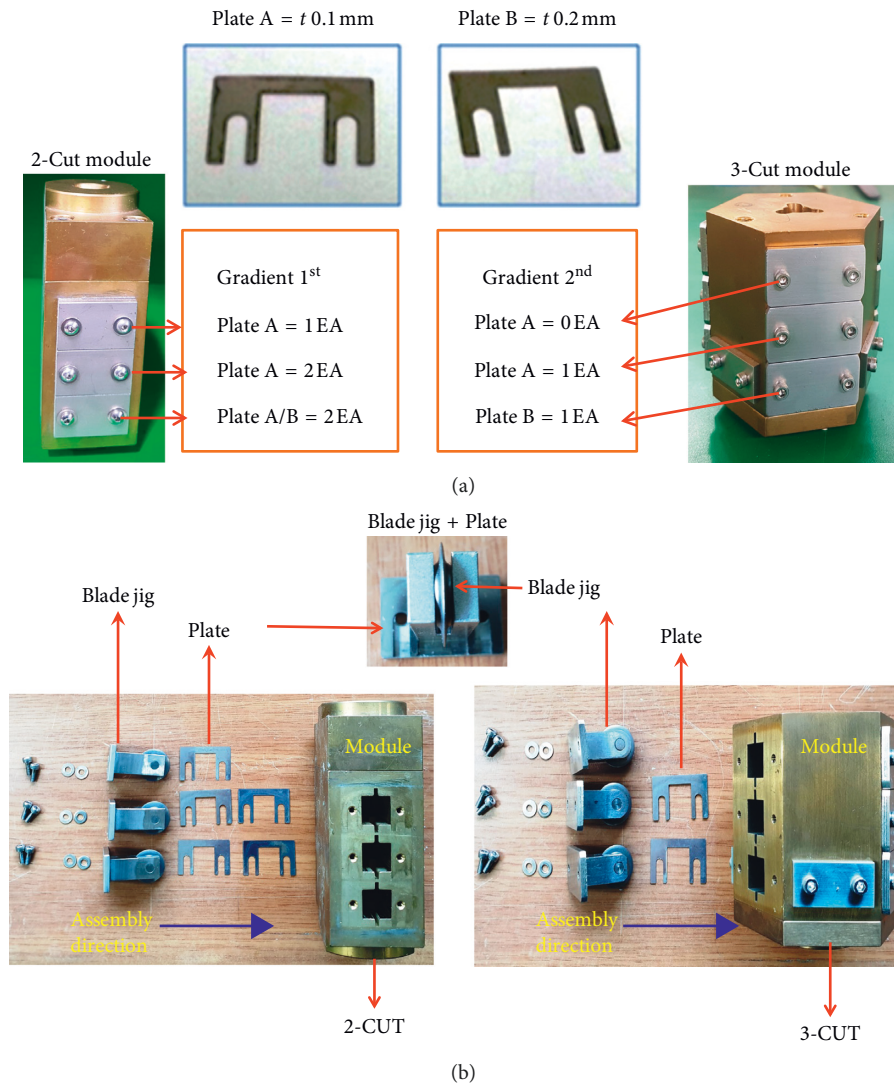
Gradient variable of modules using the plate: (a) assembly of module; (b) disassembly of module.
